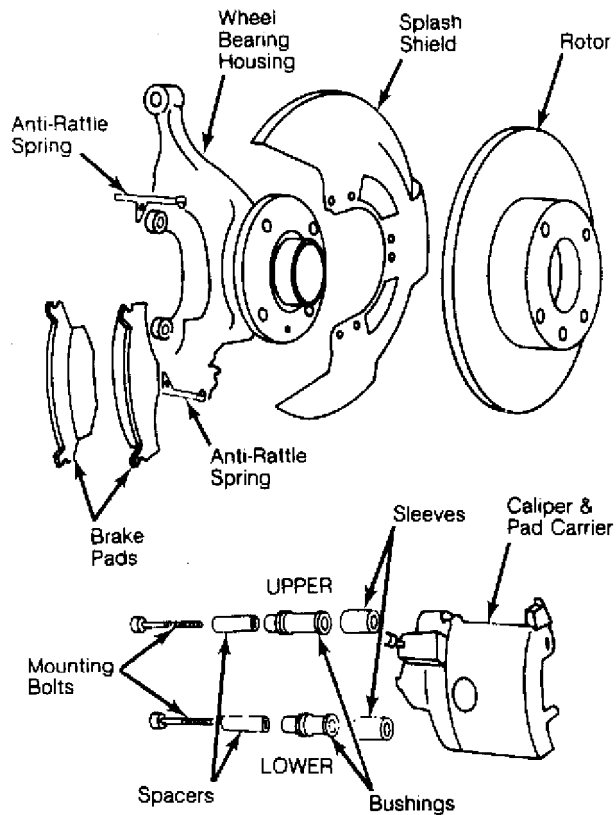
Exploded View of Front Disc Brake Assembly (All Others)
